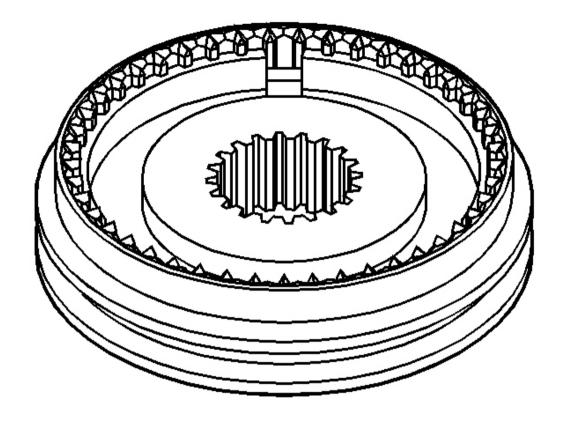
View Of Synchronizer Courtesy of GENERAL MOTORS CORP.
